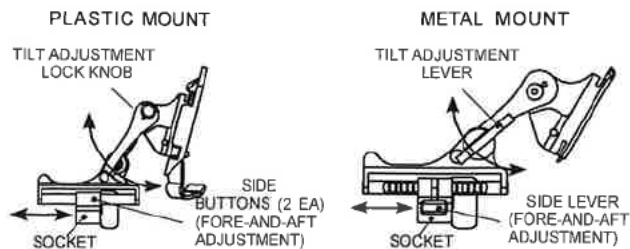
TILT AND FLIP-UP ASSEMBLY MECHANISMS
